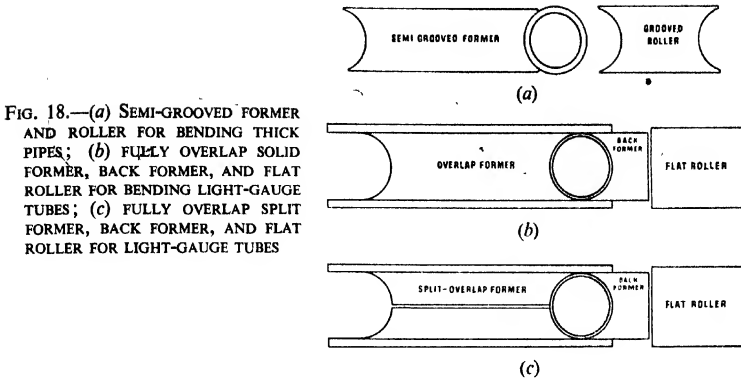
(a) SEMI-GROOVED FORMER AND ROLLER FOR BENDING THICK PIPES; (b) FULLY OVERLAP SOLID FORMER, BACK FORMER, AND FLAT ROLLER FOR BENDING LIGHT-GAUGE TUBES; (c) FULLY OVERLAP SPLIT FORMER, BACK FORMER, AND FLAT ROLLER FOR LIGHT-GAUGE TUBES
